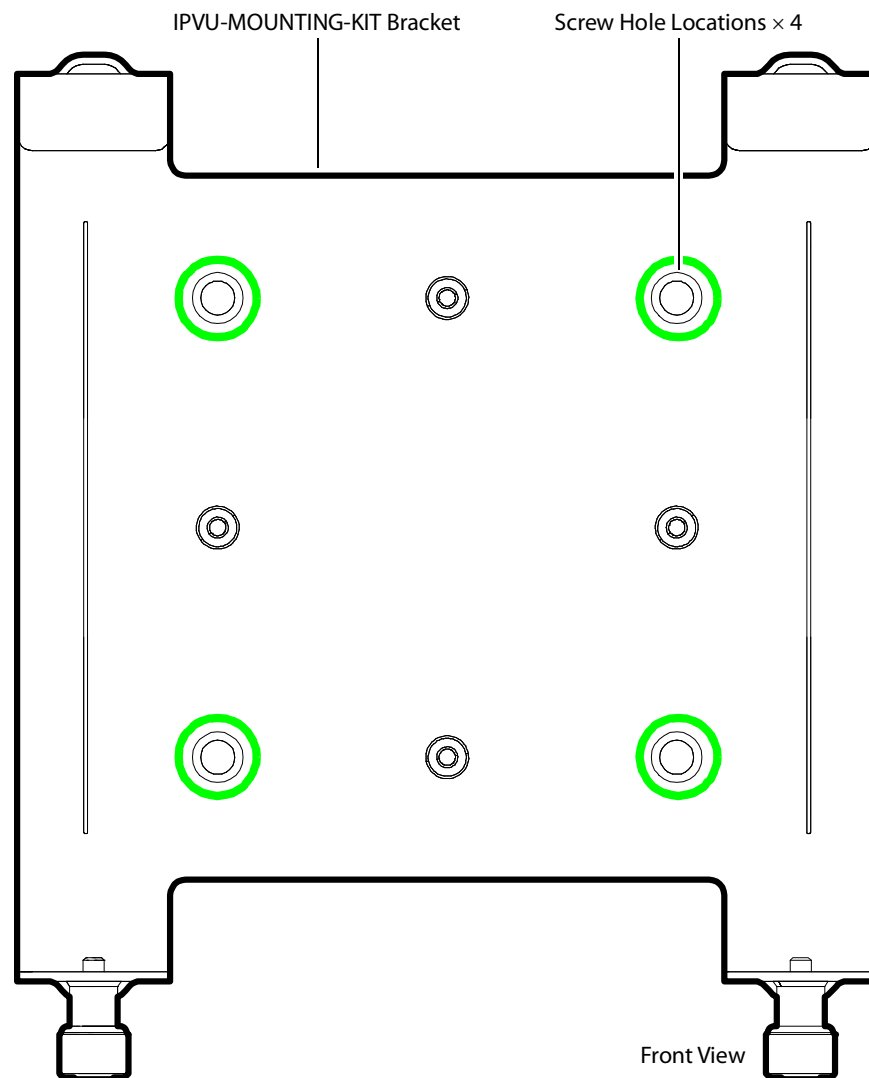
Screw hole locations for wall mounting the IPVU-MOUNTING-KIT
